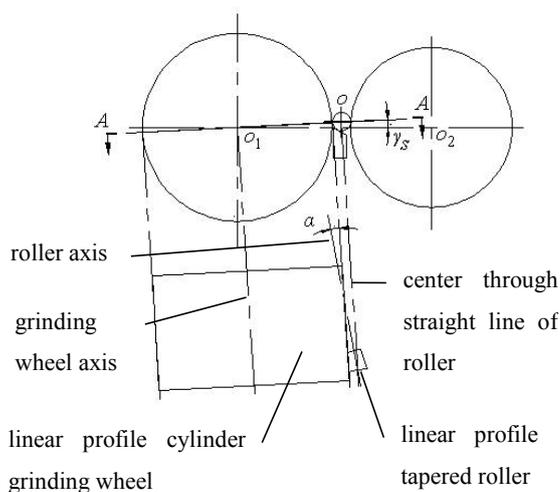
An ideal roller-grinding wheel relation in grinding linear profile roller by linear profile grinding wheel.
